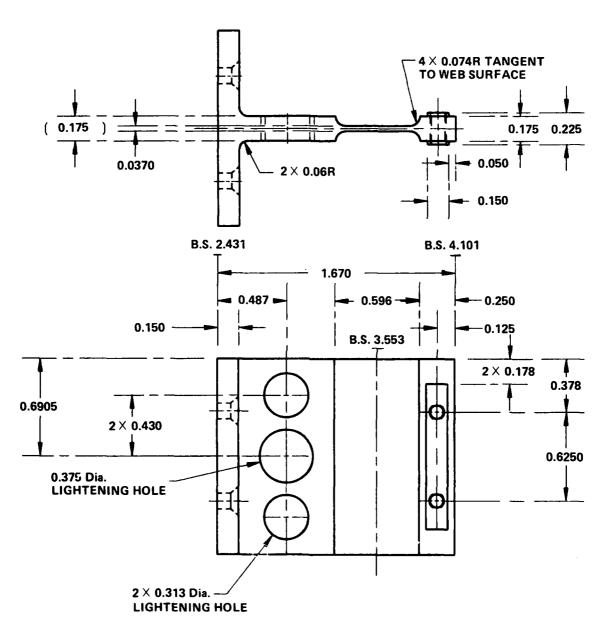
Lead-lag flexure; 17-4PH H900 steel; dimensions in inches.
